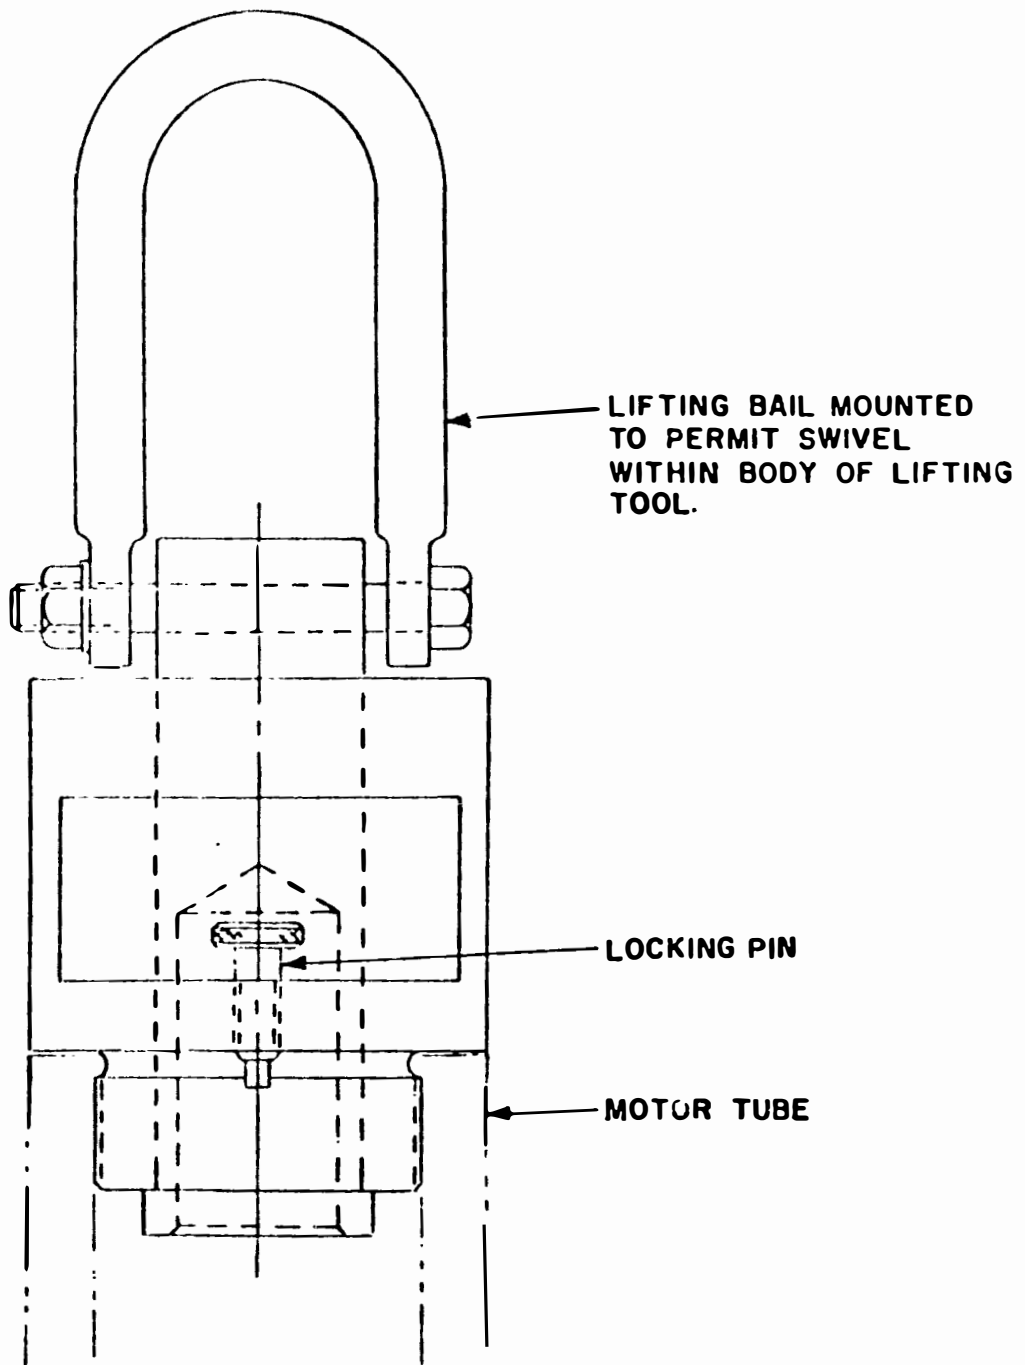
CRDM LIFTING TOOL, 703708-1150
